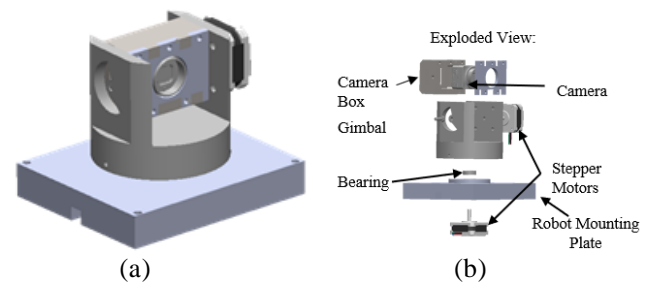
(a): CAD design of the custom camera mount. Figure 5(b): Exploded view of the camera mount design.
